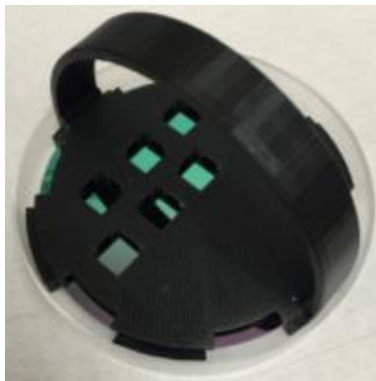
Alignment jig used to position graphene sheets above bottom gates. The jig contains an inner diameter of 100 mm to house the wafer.
